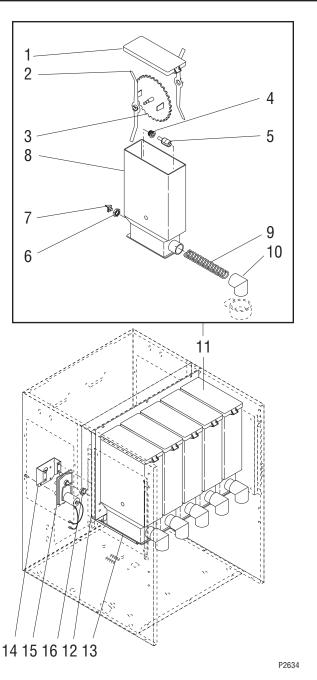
AUGER DRIVE & HOPPER DISASSEMBLY -
